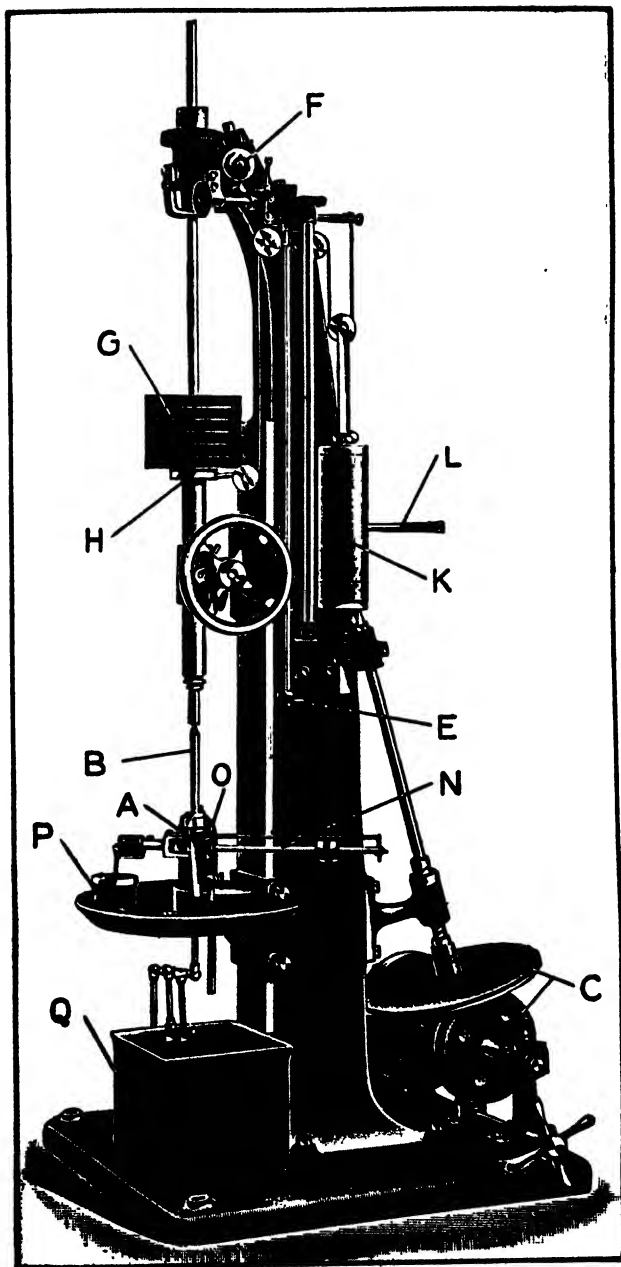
THE HERBERT AND FLETCHER TOOL STEEL TESTING MACHINE
